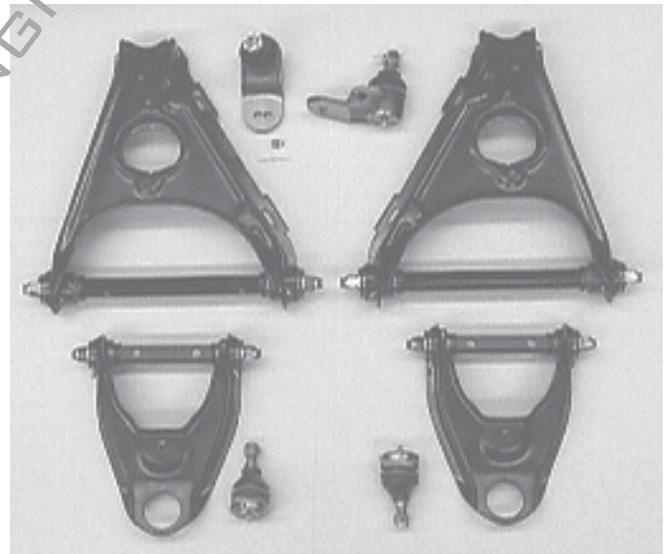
Here's the completed A-Arm sub-assemblies ready for Ball Joint fitting and installation. These ball joints and bushings are Rick's latest suspension components.
